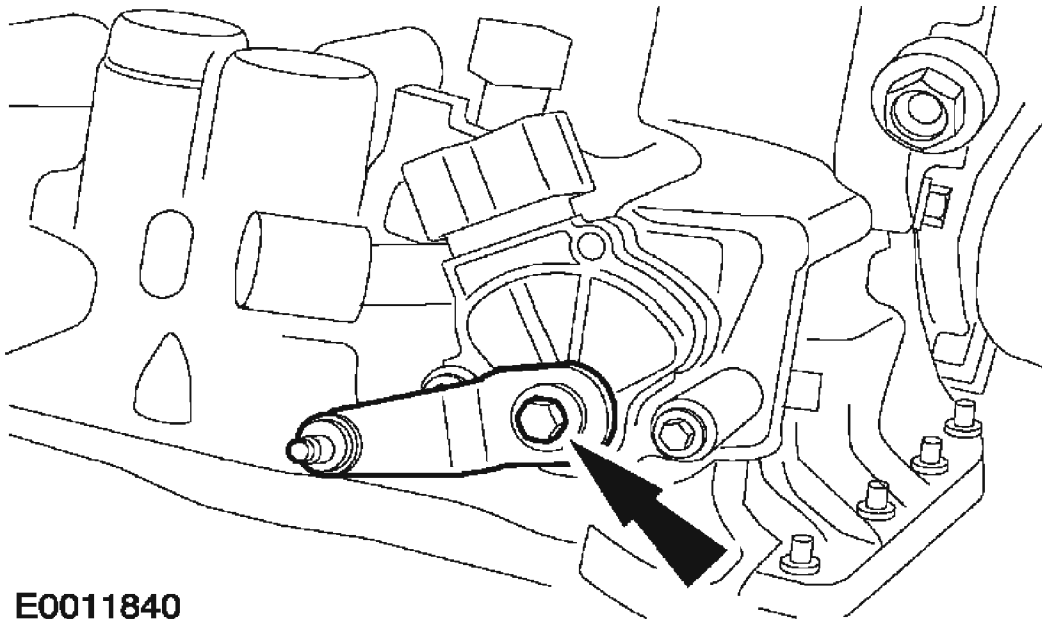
Removing Turbine Shaft Speed (TSS) Sensor
